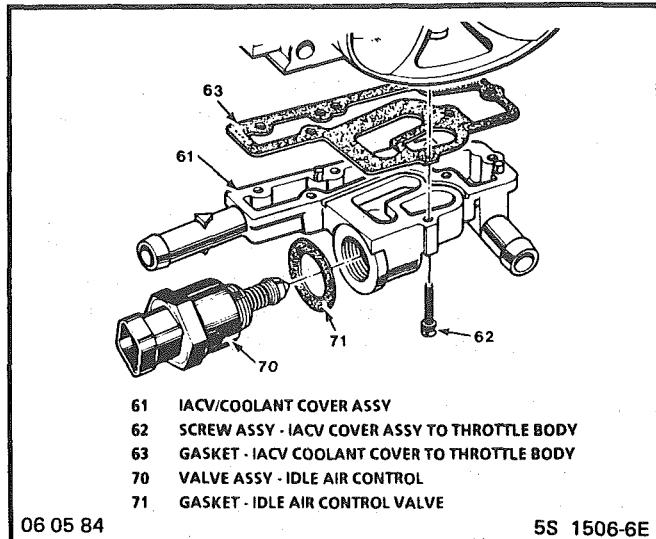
Idle Air Control/Coolant Cover Assembly
